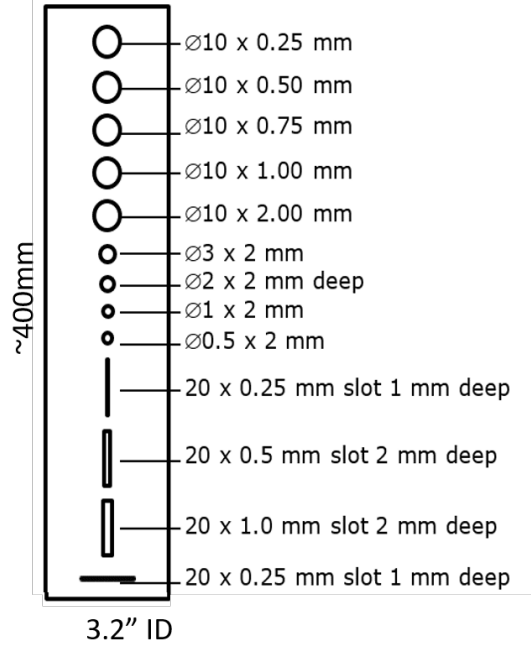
Schematic detailing the defects machined on the split pipe sample
